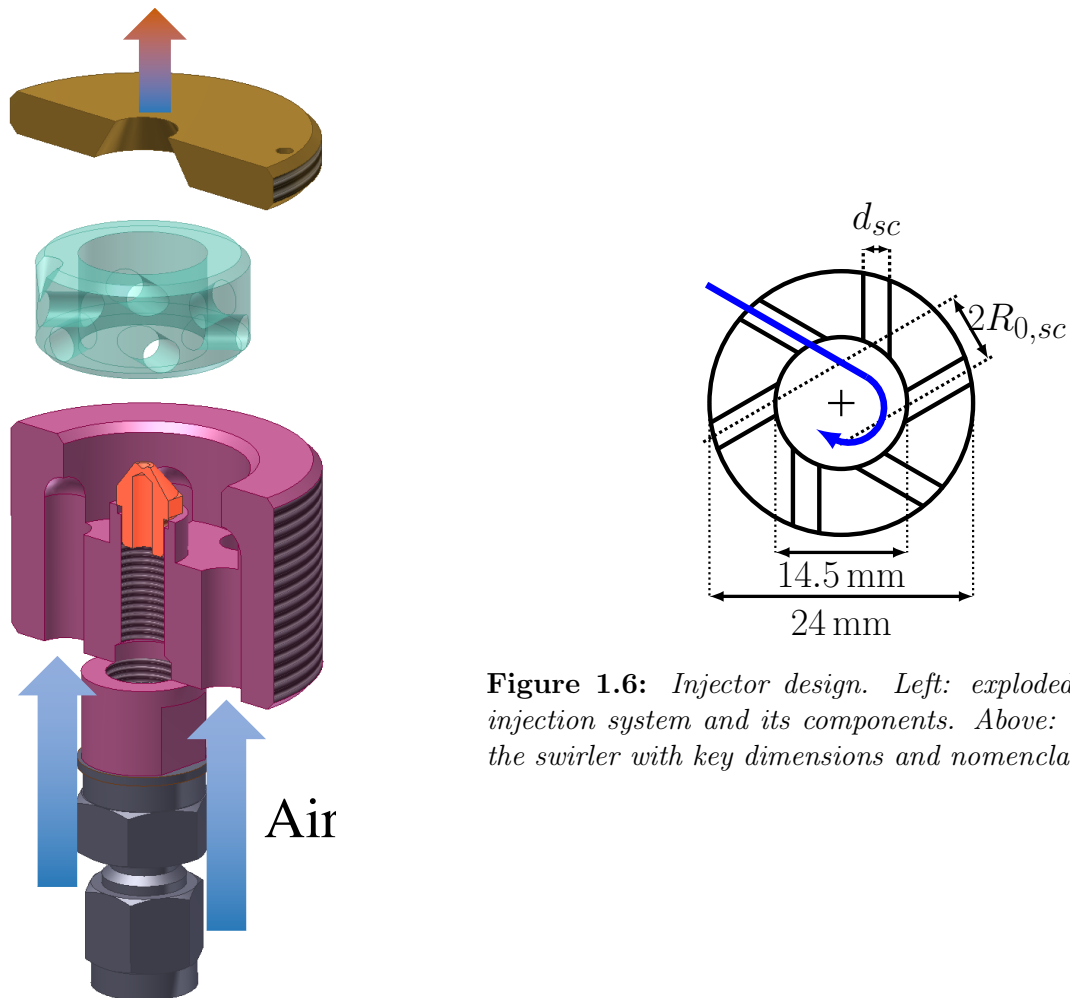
Injector design. Left: exploded 3D view of the injection system and its components. Above: schematic cut of the swirler with key dimensions and nomenclature.
